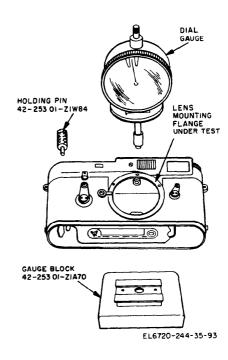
Setup for measuring camera lens flange to film plane distance.
